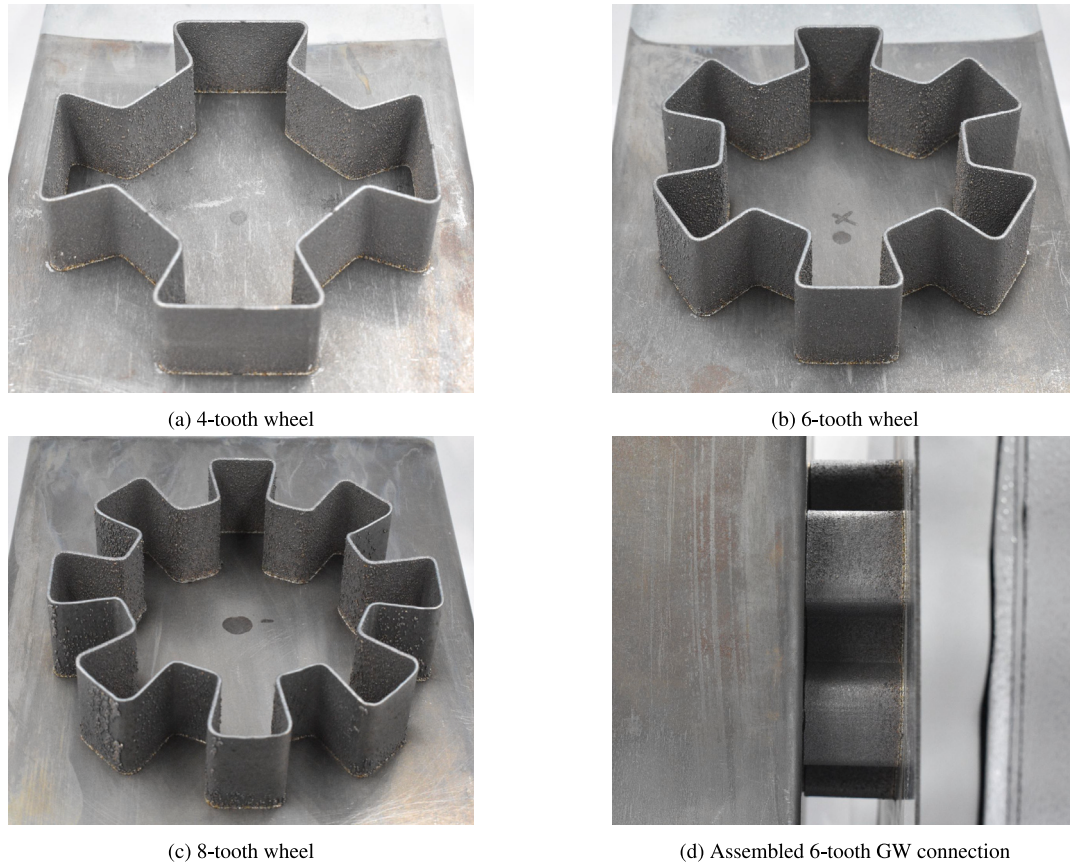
4-, 6-, and 8-tooth wheels and assembled 6-tooth GW connection printed using the LMD process.
